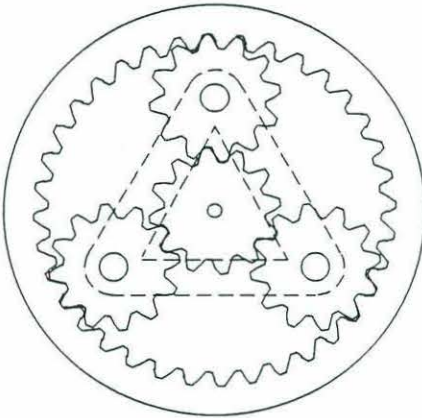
A planetary, or epicyclic, gearset. The carrier is shown with broken lines.
